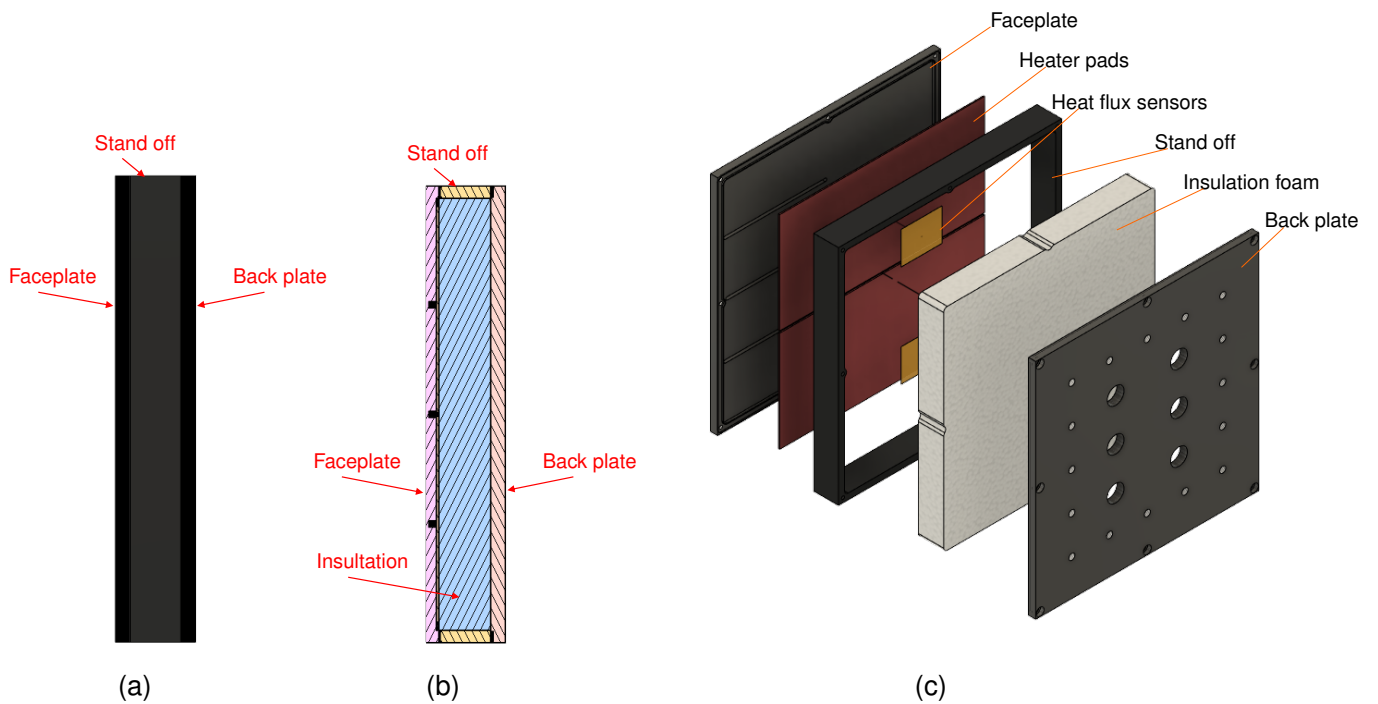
Plate heater construction (a) side view, (b) section view and (c) exploded view.
